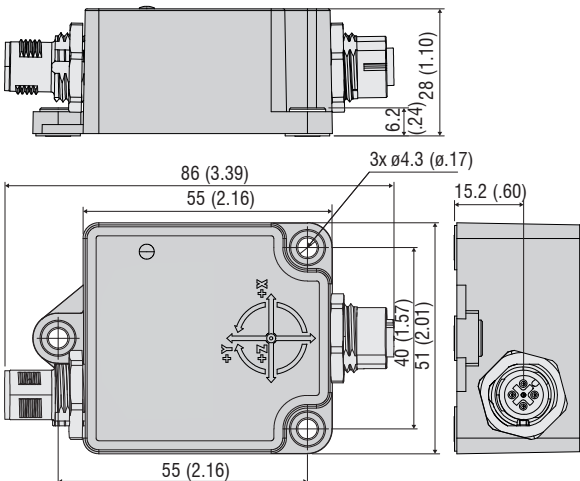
Dimensional drawing INC5502D-360/90-P-DS-CO, dimensions in mm (inches, rounded off)
